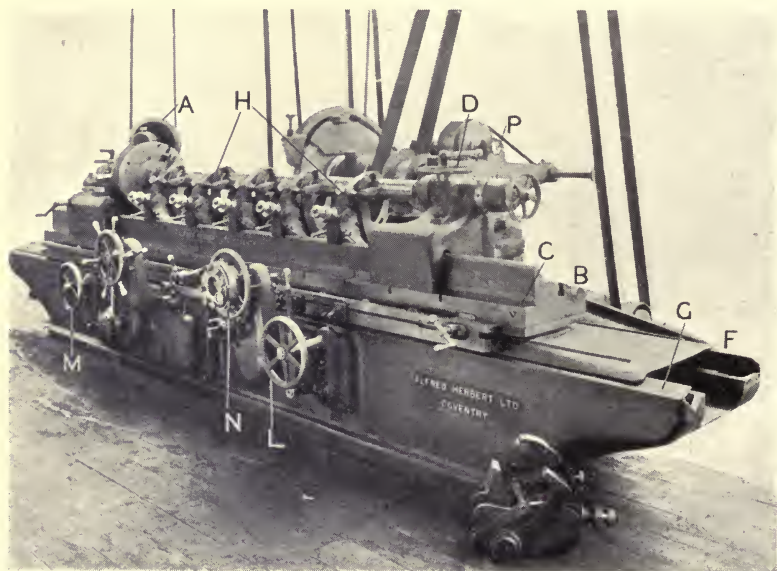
HERBERT UNIVERSAL GRINDER, 24" × 12' 0"
